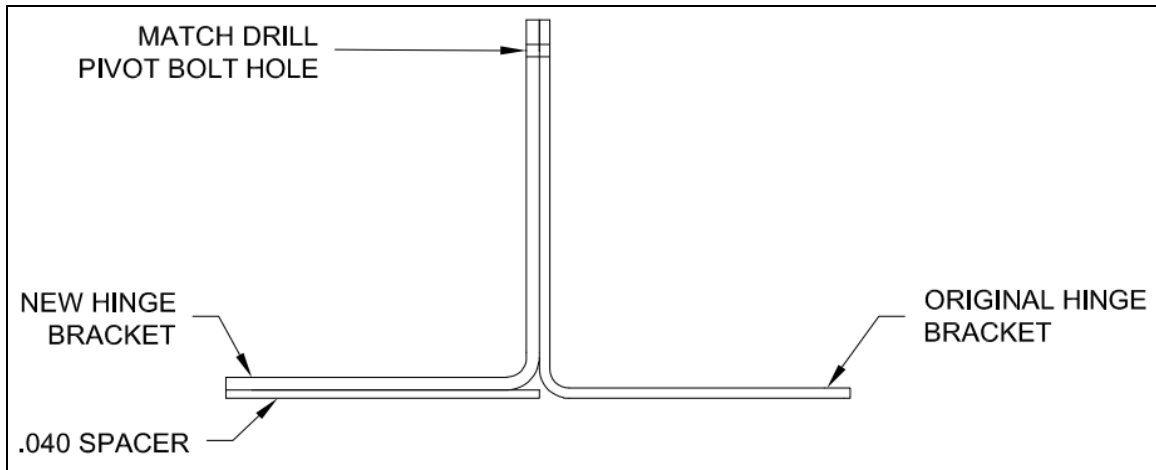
MATCH DRILLING PIVOT BOLT HOLE
